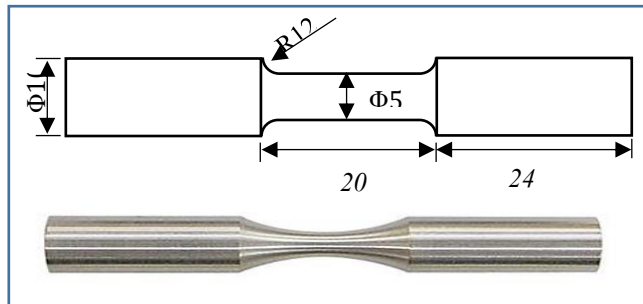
Fatigue Test Specimen According to the ASTM E466 Standard.
